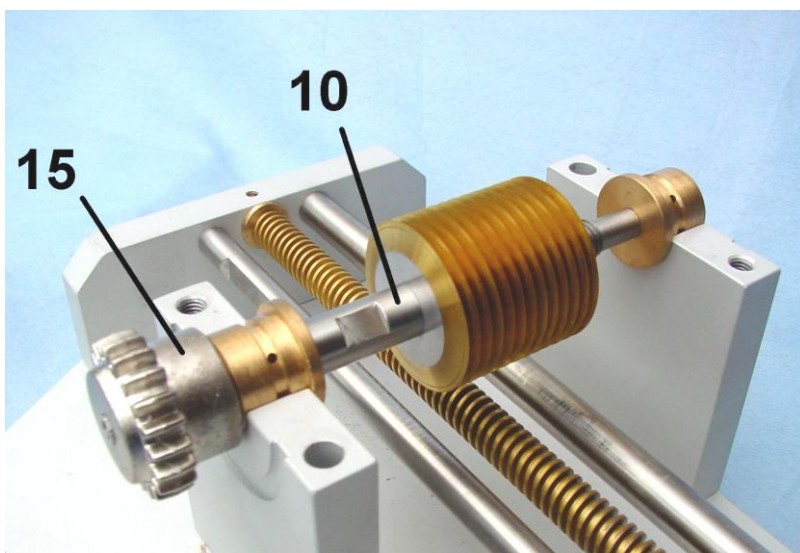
Blades axis with the bearings in their seats and the coupling to the left side
